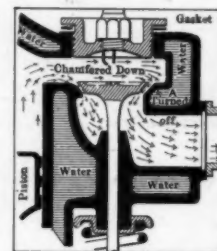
Section of a motor cylinder after the valve seats are refaced.
